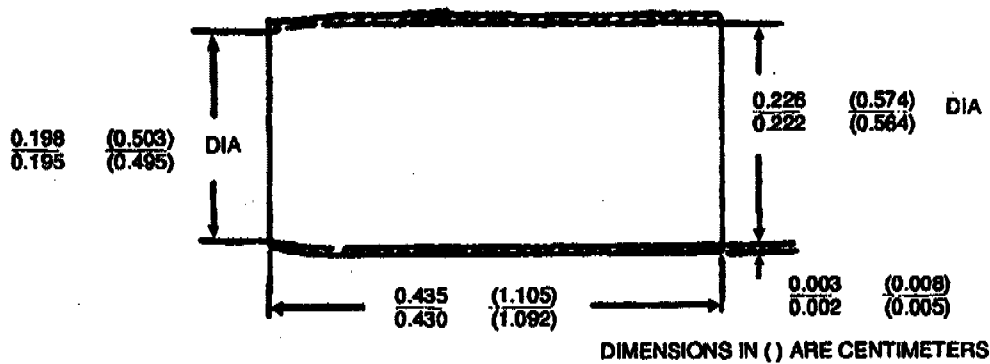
Nozzle Secondary Screen Dimensions for Fabrication of Sizing Brass Rod.
